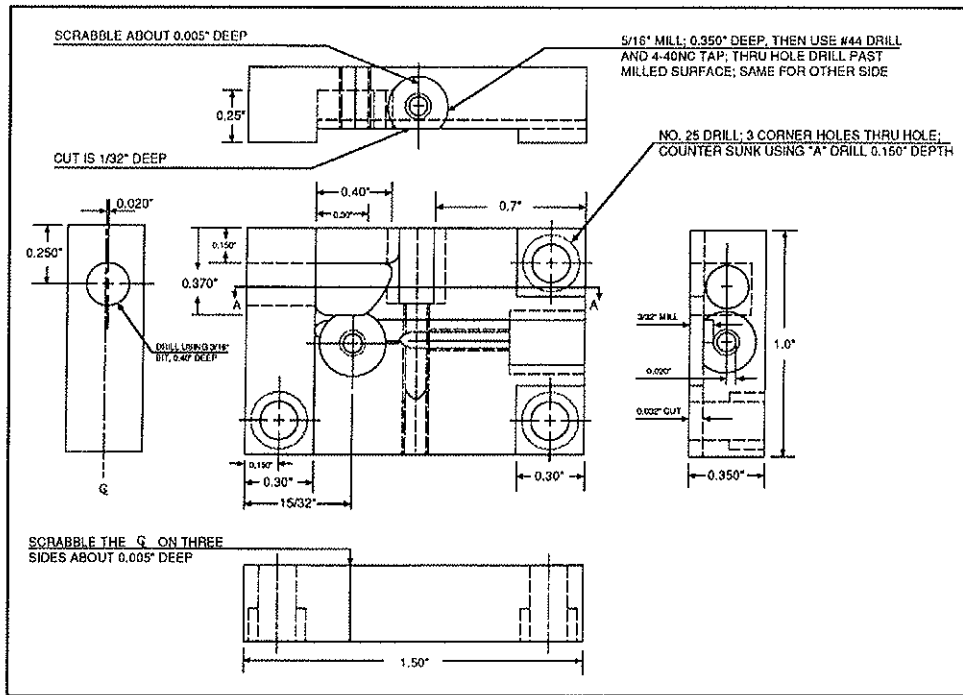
Schematic drawing of a fixed coil set which are installed on inside wall of MST.
